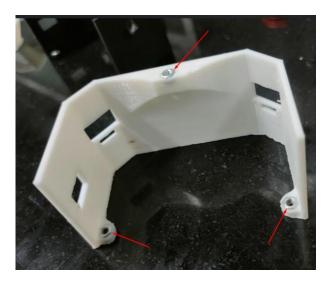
3D printed model after Attached with the 3M nuts at the mounting points
